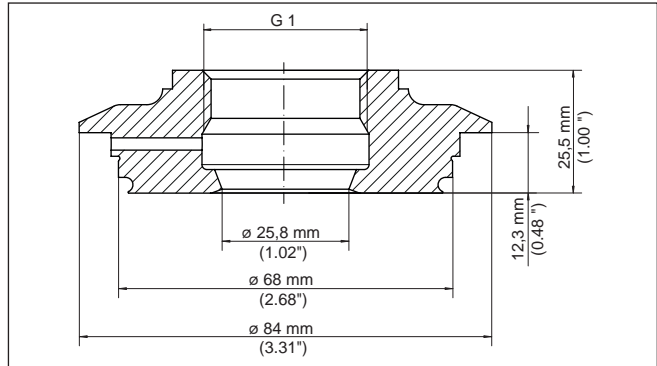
Dimensions hygienic adapter G1 (DIN 3852-X) on Varivent Form F DN 25 - Cone seal
